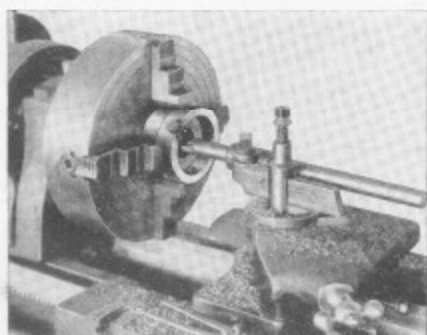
Making a Replacement Part for an Orphan Car in the Auto Shop Lathe.
